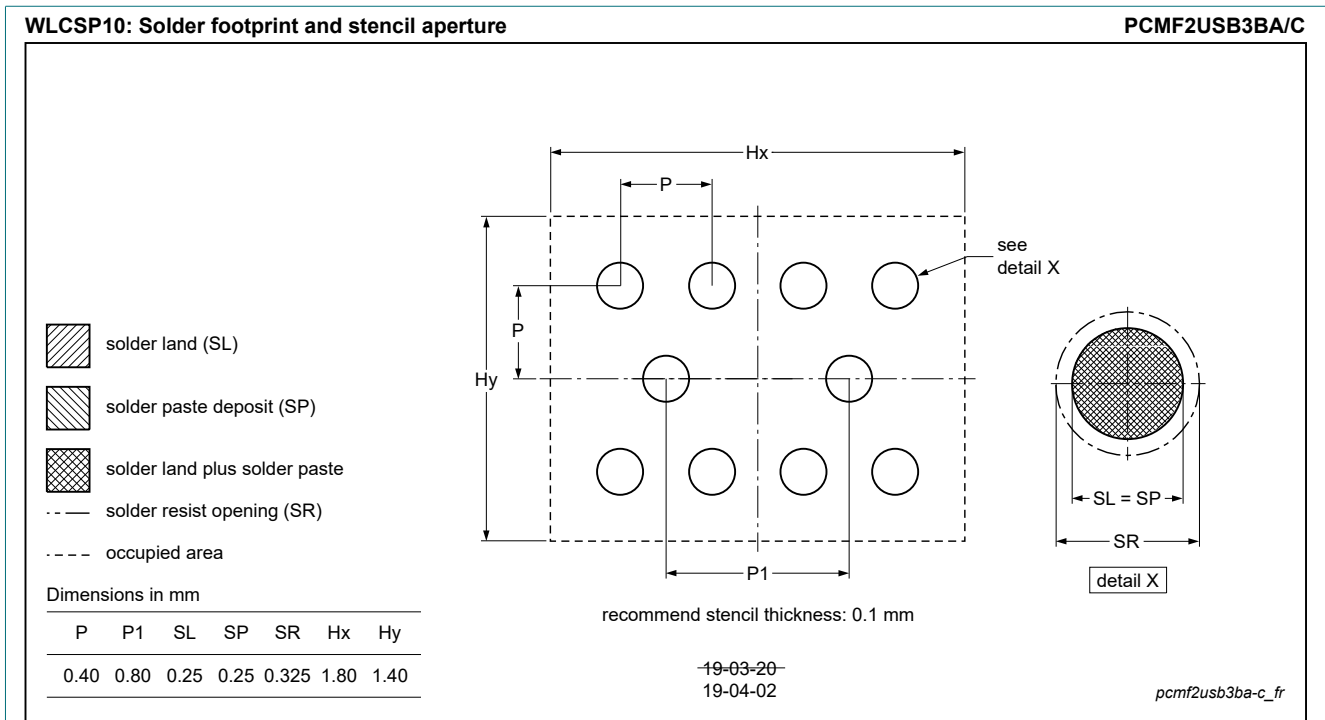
Soldering footprint WLCSP10 (PCMF2USB3BA/C)
